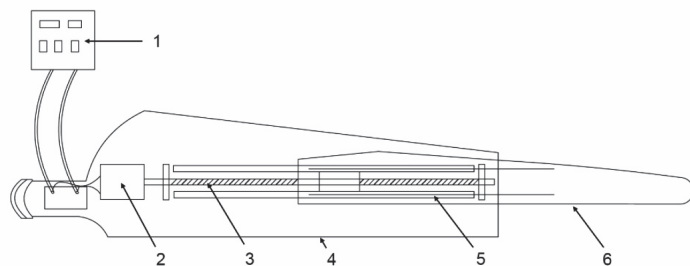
Components of variable length blade wind turbine: 1 – control unit, 2 – DC motor, 3 – drive screw, 4 – root blade, 5 – rails, 6 – tip blade
